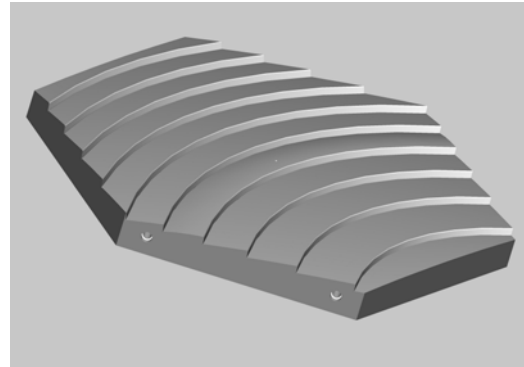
3D-drawing of the mold for the Fresnel modules production.
